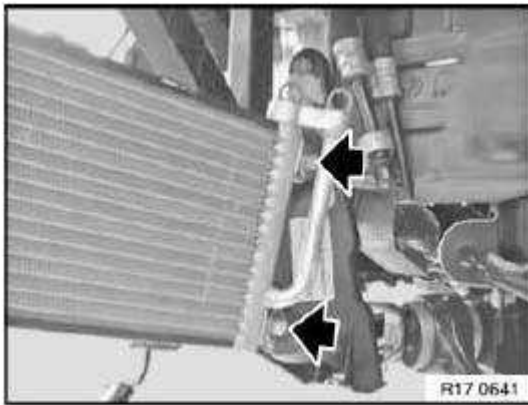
Locating Mount Engine Oil Cooler On Oil Cooler Bracket (M8X35 Screw)
